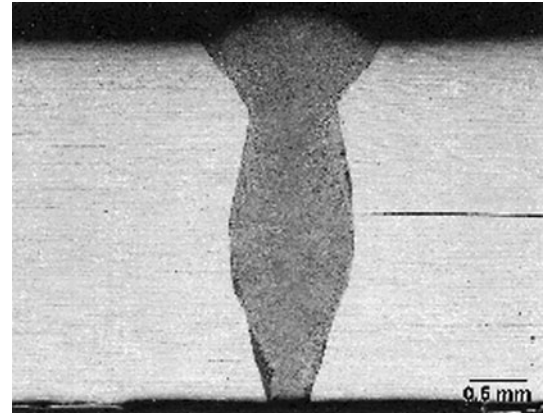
Transverse cross section of deep-penetration weld adopted for prototype analysis
